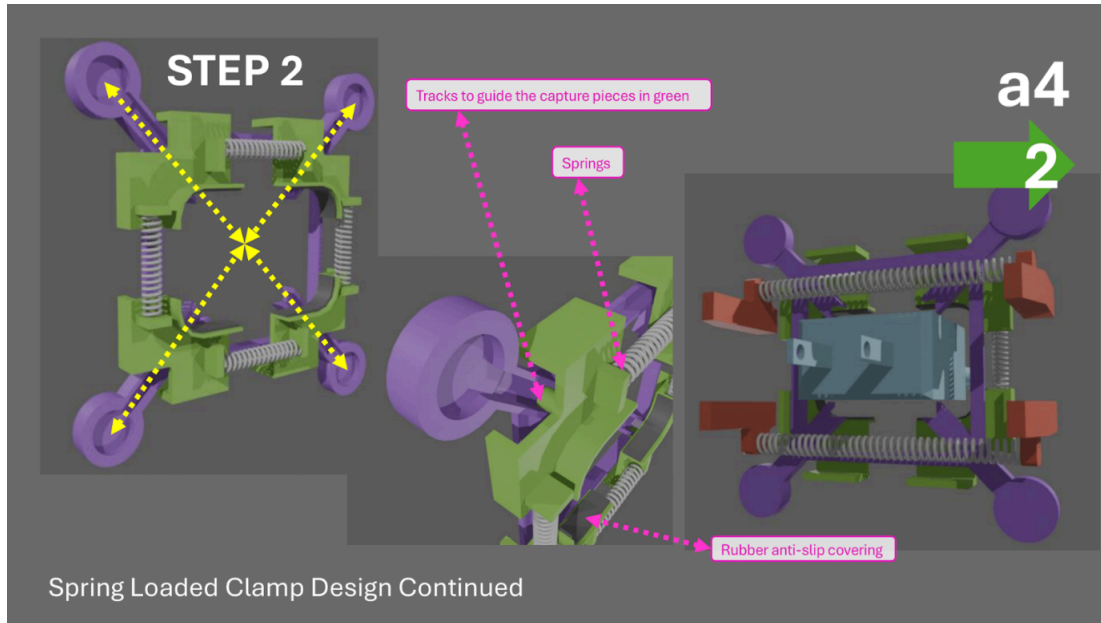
Demonstrates the bracketing mechanism used to attach the device to the plug.
